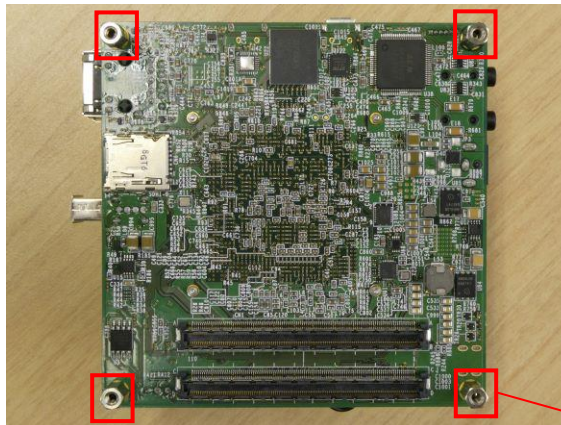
retain the removed the acrylic plates, spacers, and screws unused
